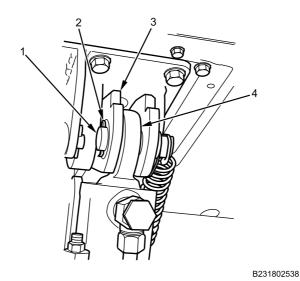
Hydraulic Cylinder Upper Lockpin Shaft and Cotter Pin.
